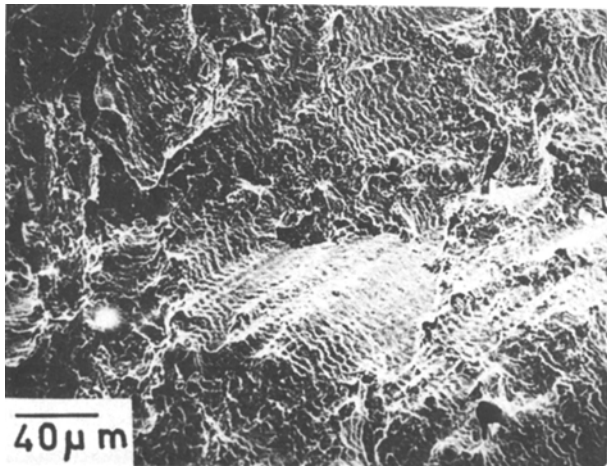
Typical fatigue fractures and striation morphology in 13% chromium steel.
